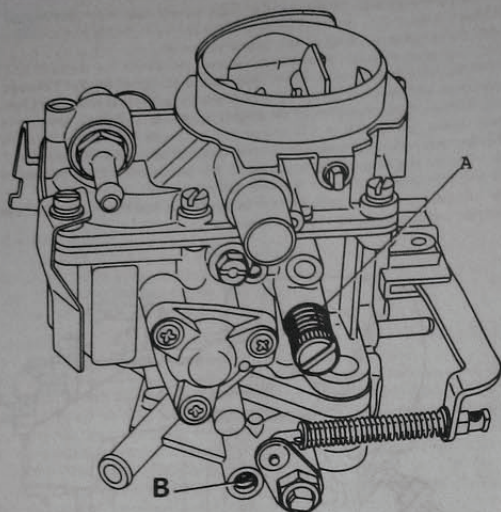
Solex carburettor volume control screw (A) and mixture adjustment screw (B) (Sec 14)
